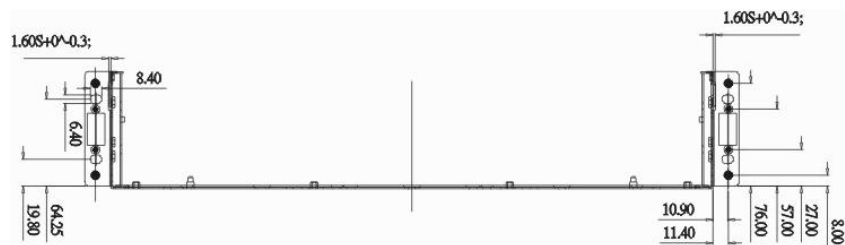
Enclosure Side Mounting Holes (1)
